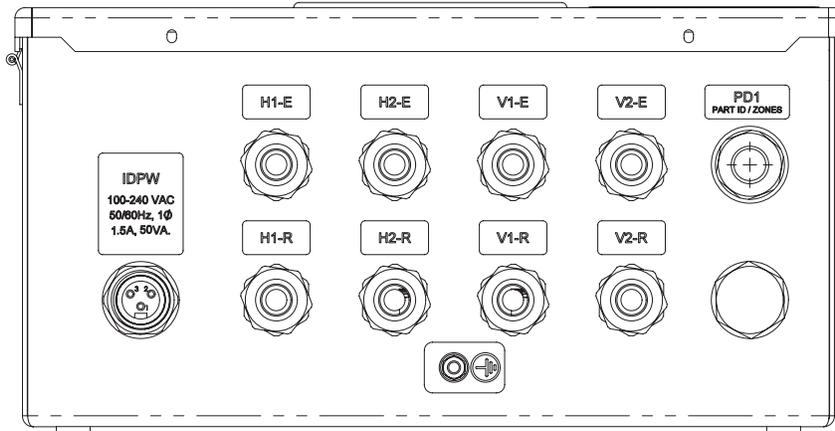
Beam Array Sensor Cable Entrance to Junction Box (outside bottom view)
